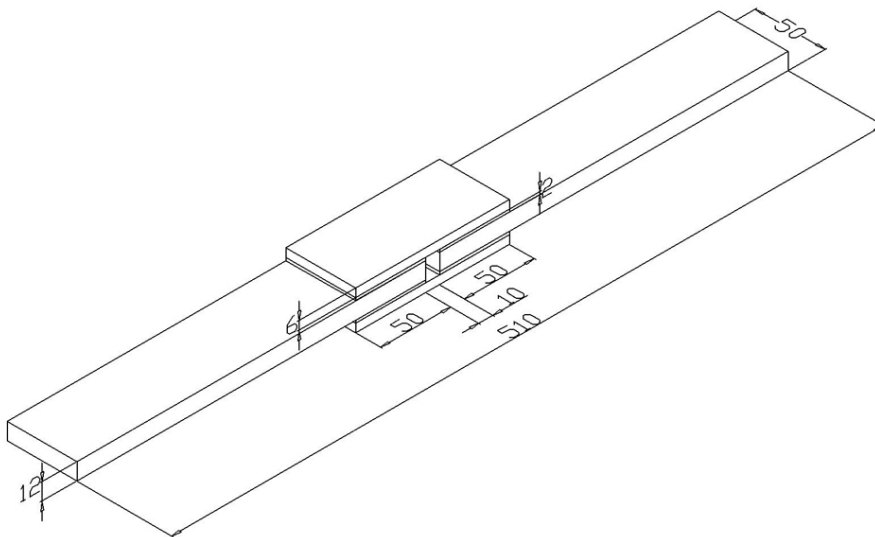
Geometry of double-lap joint specimen (dimensions in [mm]).
